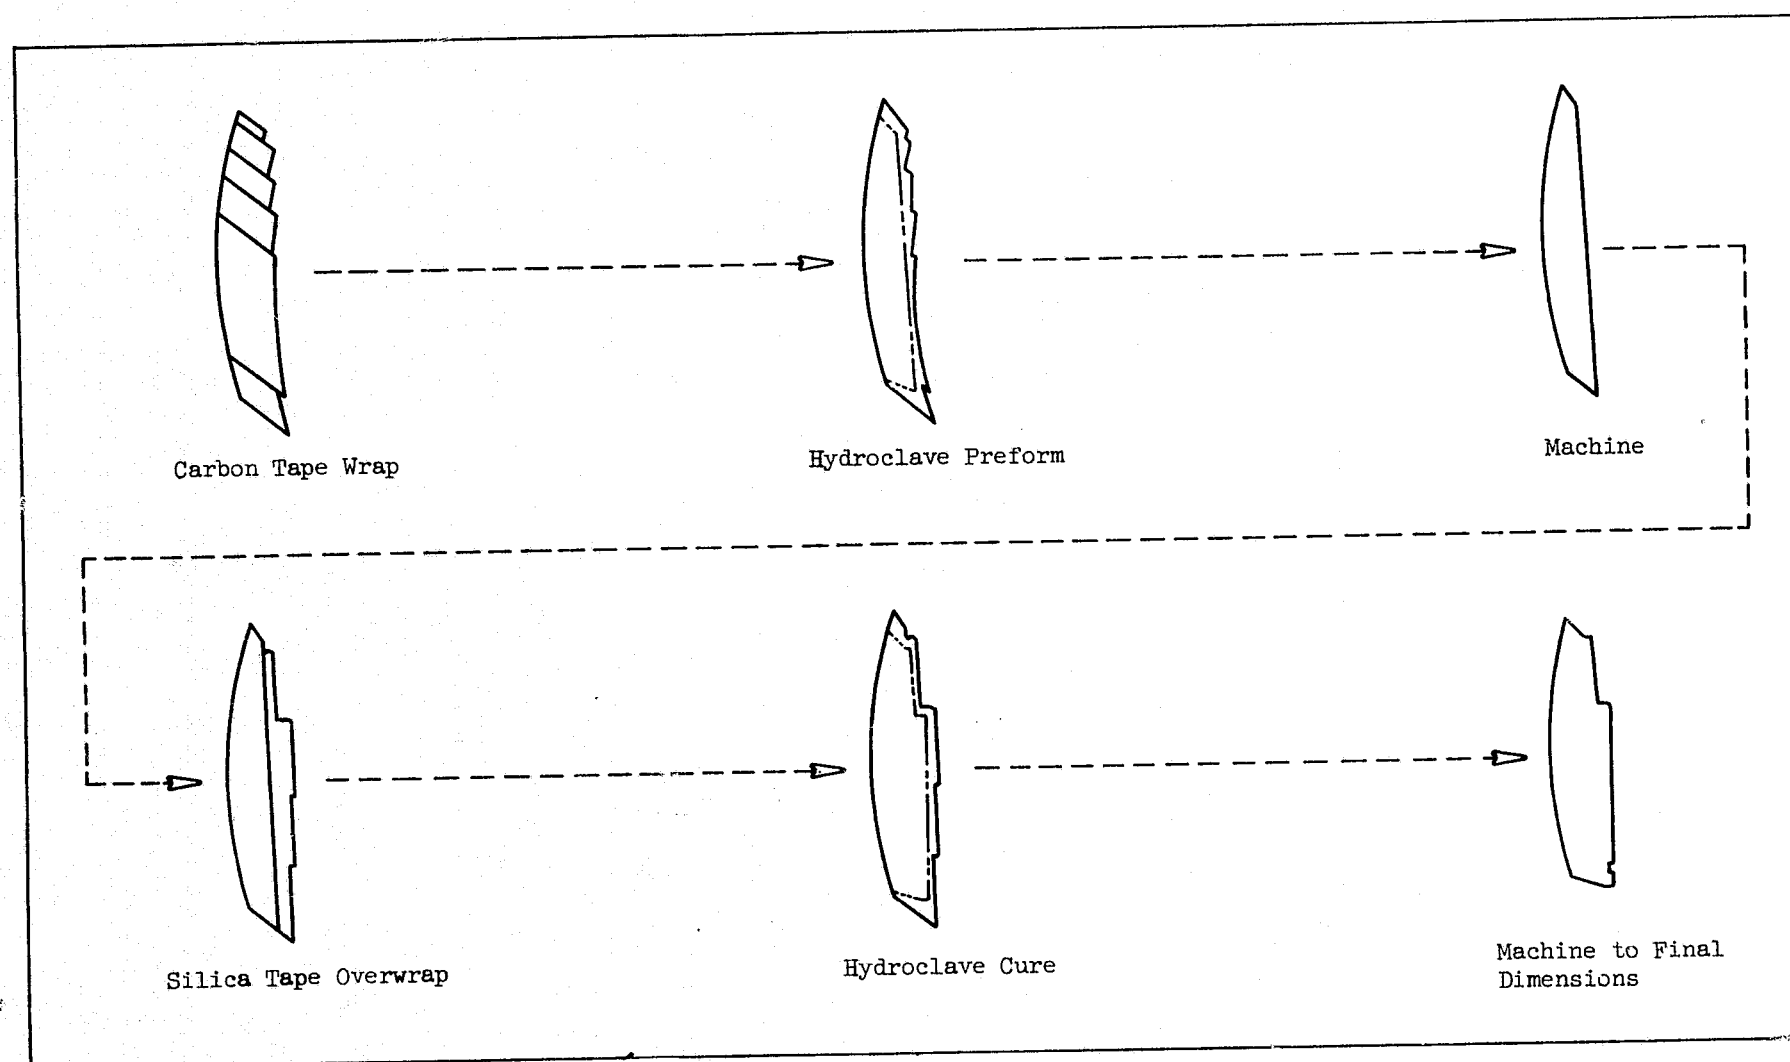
THROAT INSERT FABRICATION
